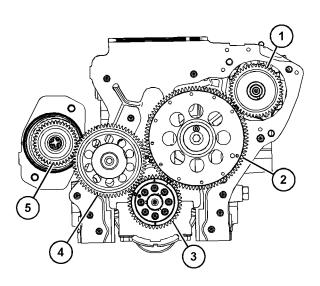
g06148329 Typical example of the rear gear train (5) Accessory drive gear (if equipped) (1) Fuel injection pump drive gear (2) Camshaft gear Torque for securing bolt for the camshaft gear95 N·m ((70 lb ft)) (3) Crankshaft gear Bore diameter of crankshaft gear ..74.00 to 74.03 mm ((2.91338 to 2.91456 inch)) Installation limits of the crankshaft gear on crankshaft -0.047 to -0.096 mm ((-0.00185 to -0.00378 inch)) (4) Idler gear Torque for the bolt for the idler gear 30 N·m ((266 lb in)) Width of idler gear bush 15.18 mm ((0.59764 inch))
